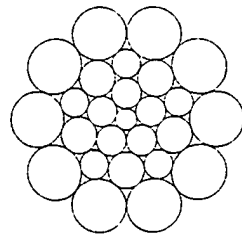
Cross section of a Warrington Seale-type strand (10+5+5+5+1) wires
